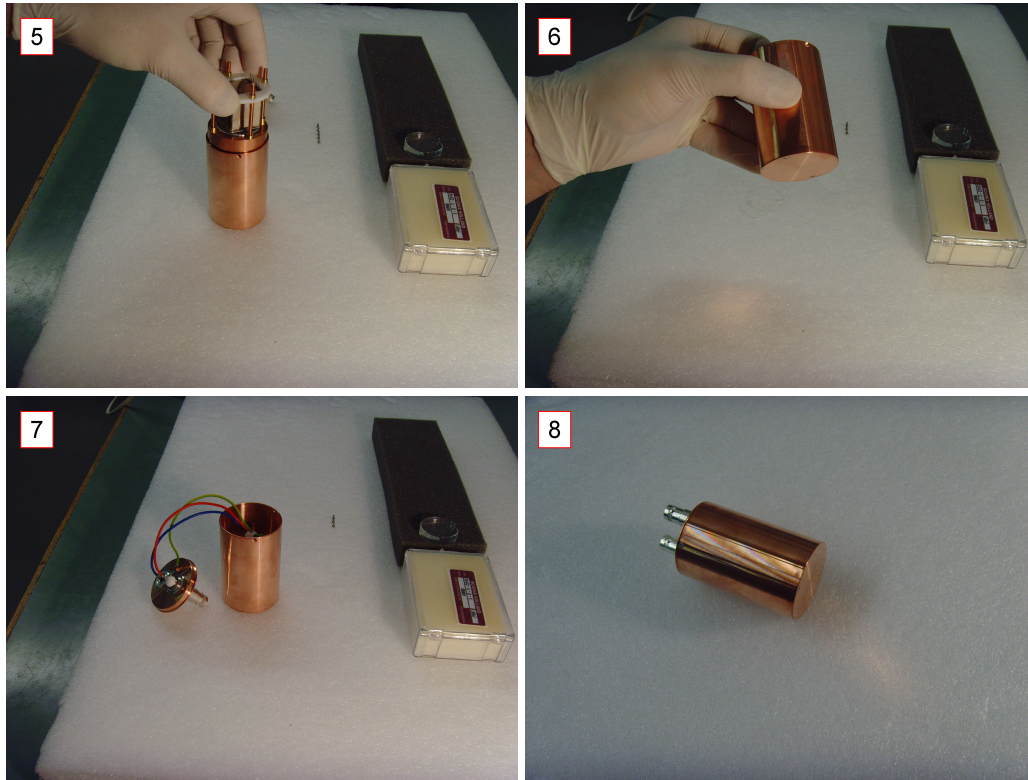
Final detector mounting: 5) inserting the PMT structure with the coupled crystal into the housing. 6) Fixing of the crystal holder from the bottom of the housing, using two M2 screws. 7) PMT base is mounted and the detector ready to be closed. 8) Fully assembled detector.
